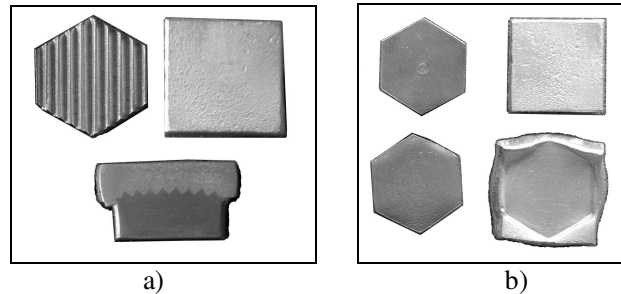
Al-Cu pressed samples at the same deformation rate: a) weld on cogged surface; b) un-weld samples on plane surfaces
